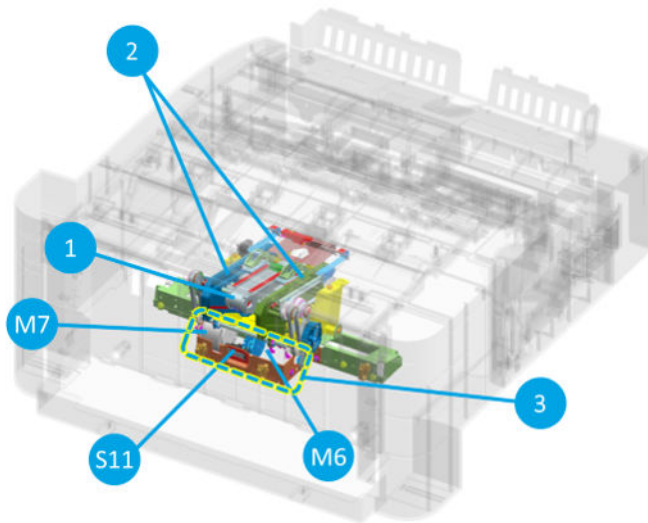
Inner finisher system - ejector unit detail view (1 of 3)
